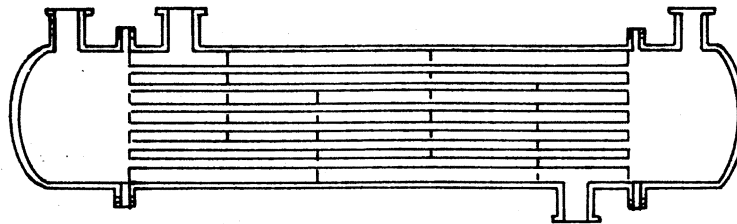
One Tube-Pass Fixed Tube Sheet Heat Exchanger
